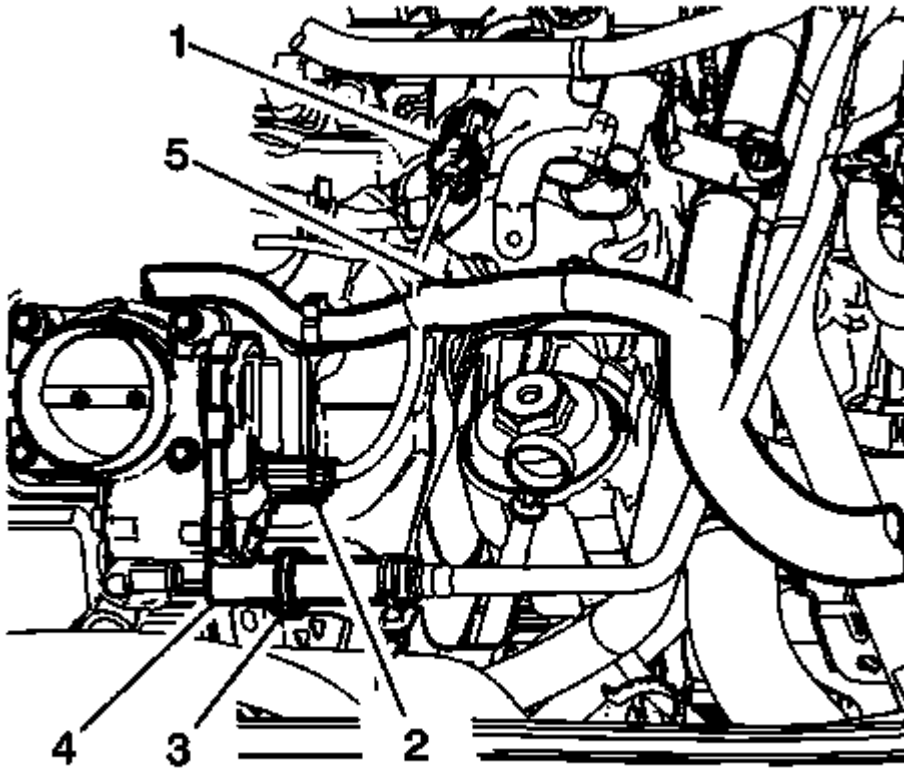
Engine Harness And Vacuum Brake Booster Hose
